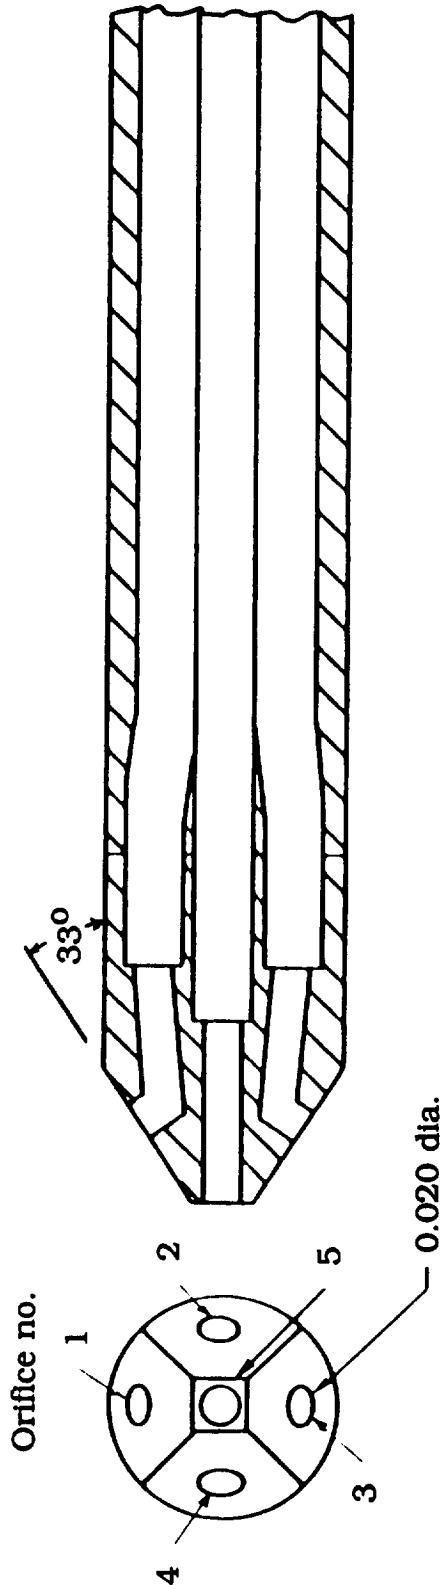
Five-hole pyramid-head flow angularity probe. (Dimensions in inches.)
